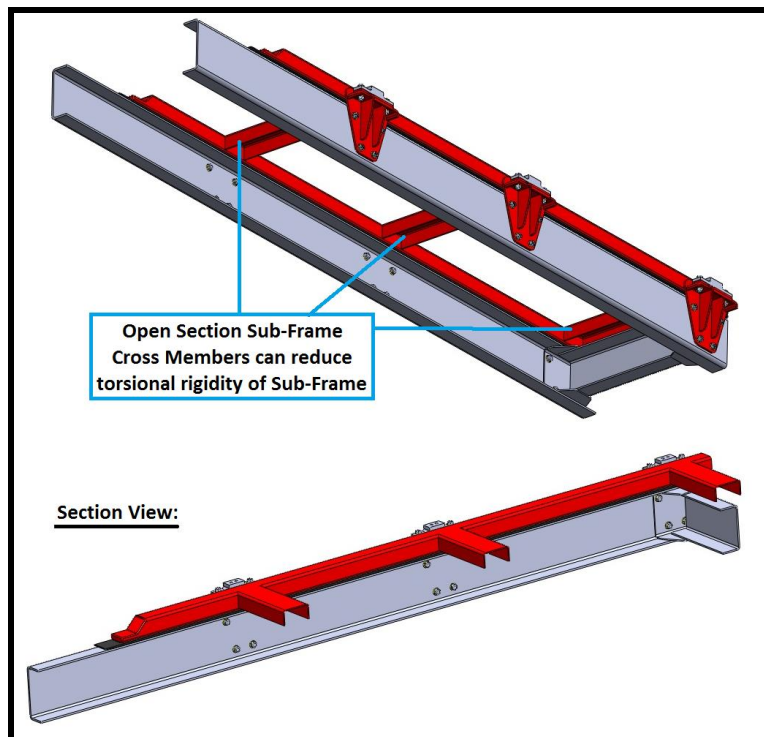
OPEN SECTION SUB-FRAME CROSS MEMBERS
